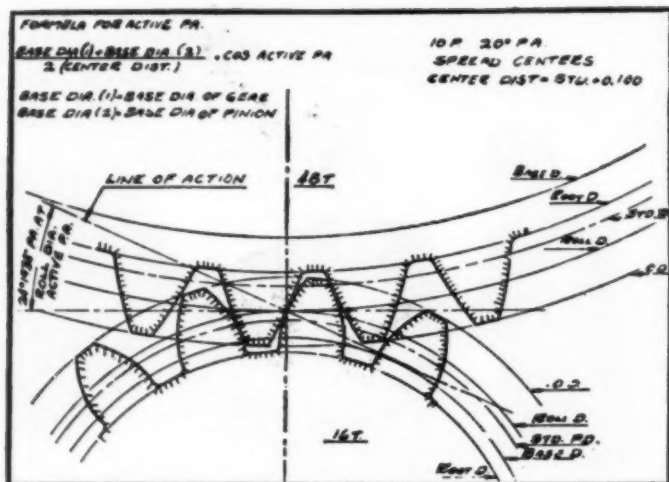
Standard gears cut with oversize diameters and run at spread center distance of 0.100, cut with a standard 10 pitch, 20° pressure angle shaper cutter. Rolling diameter and pressure active angle are changed.
